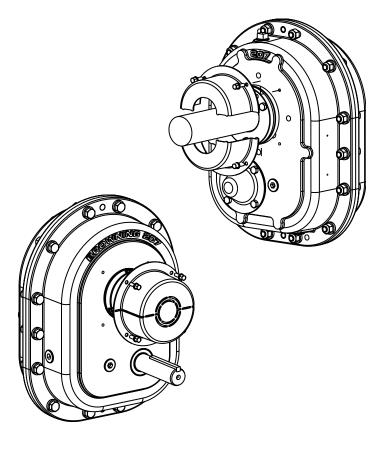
position bushing guard mounting holes at 45° off of vertical and horizontal.
